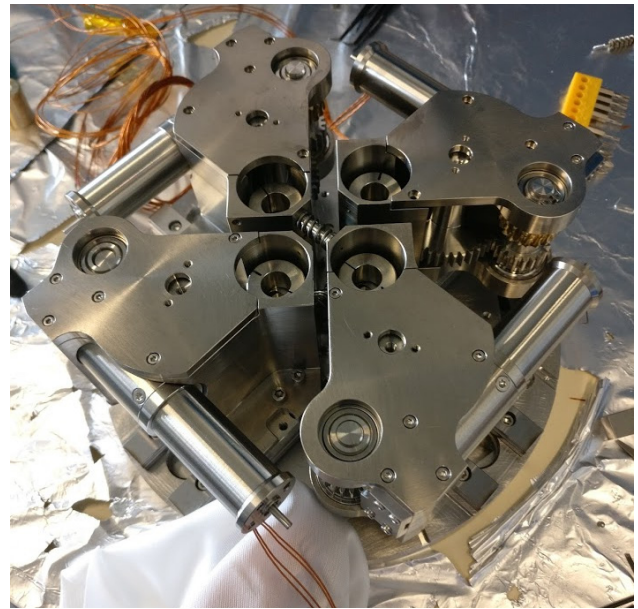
MAGSTAT V3 prototype main parts overview. Magnets are not mounted on the picture.
